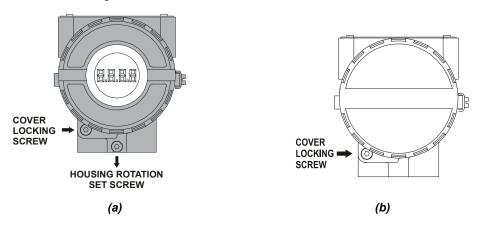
Cover Locking and Housing Rotating Set Screw (a) Electronic Board Side (b) Terminal Connection Side
